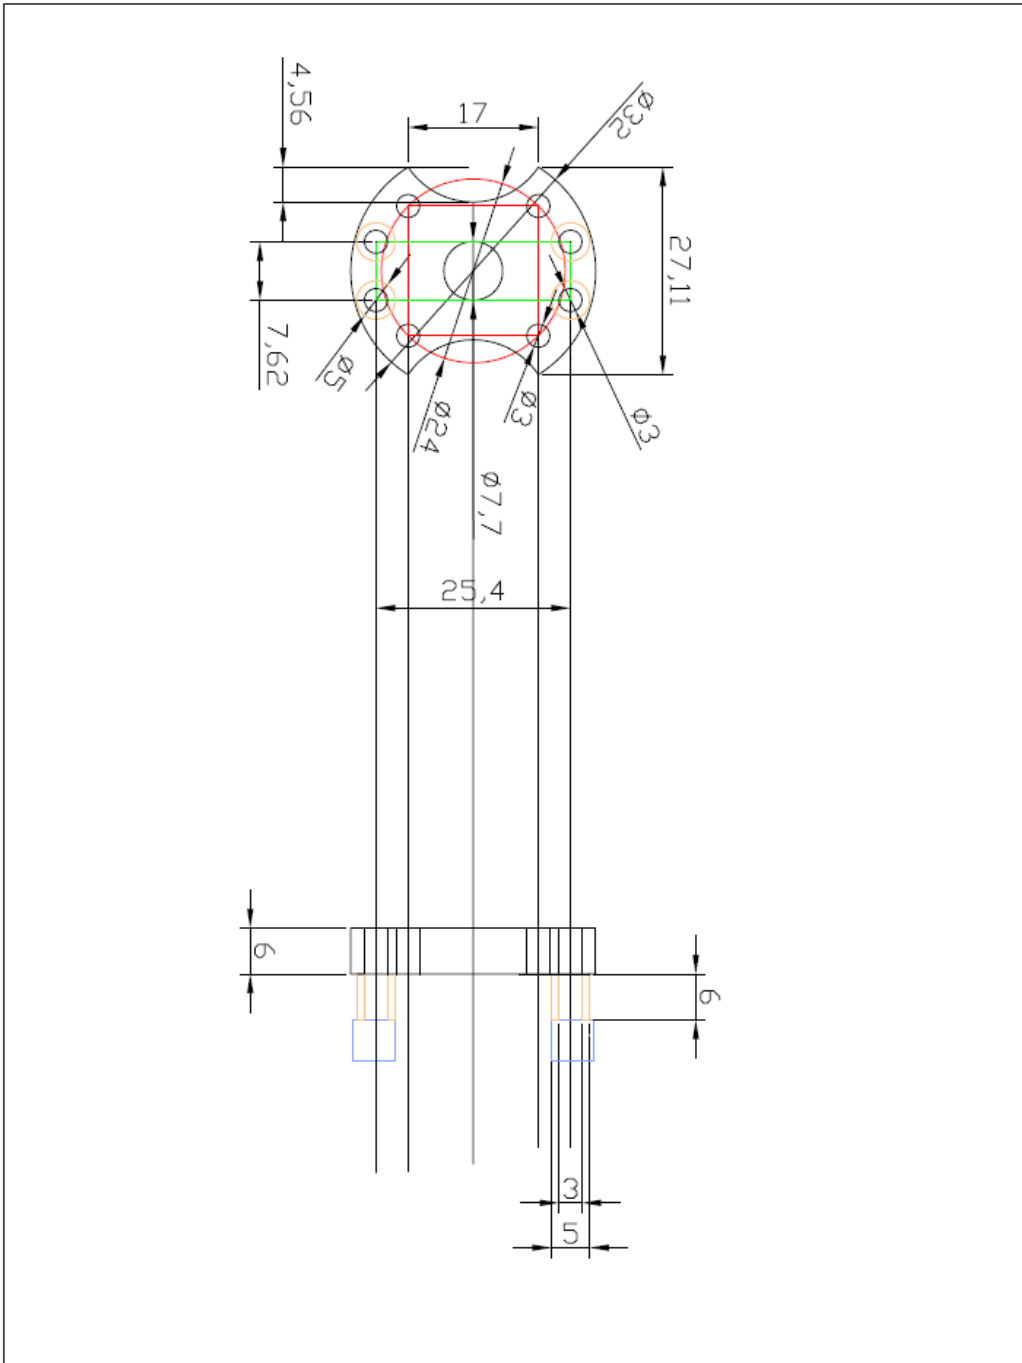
The Macor plate and the mounting scheme of the plate to the groove grabber using stainless steel spacers.
